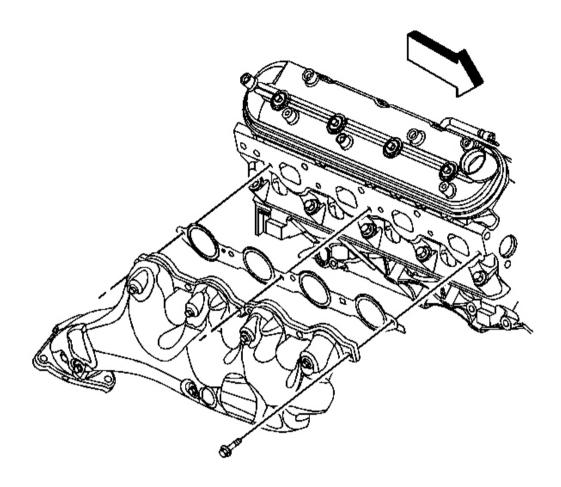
View Of Exhaust Manifold, Gasket & Bolts Courtesy of GENERAL MOTORS CORP.
